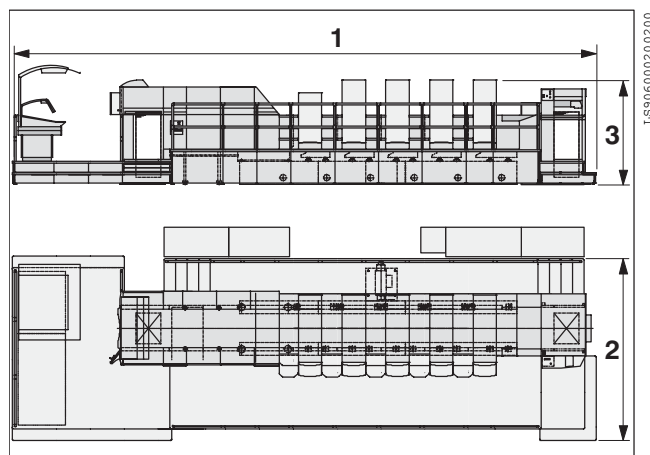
Dimensions of the printing press without DryStar UV in elevated installation (XL 75-4 + L)
